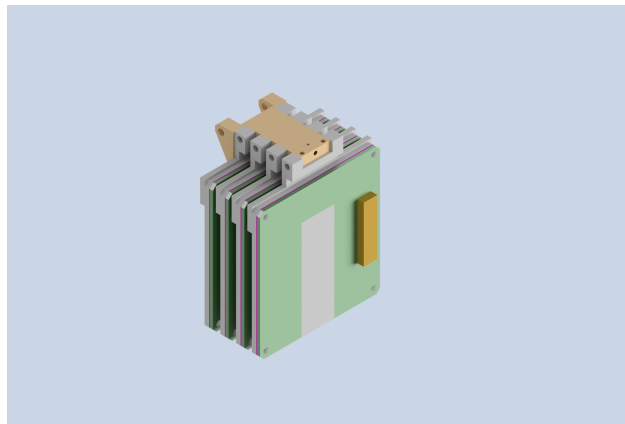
CAD illustration of the new four-plane electron detector assembly.
